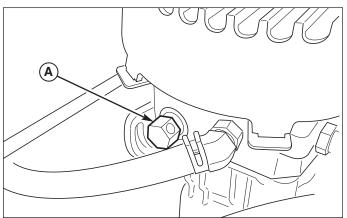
Hydraulic System By-Pass A. Hydraulic Release Valve (left-hand pump shown)
